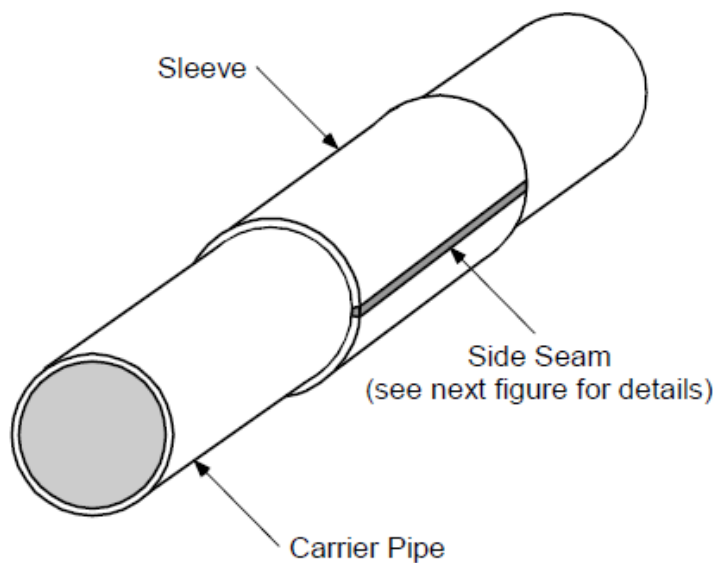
Illustration of Type A (reinforcing Sleeve) Ref [3]
